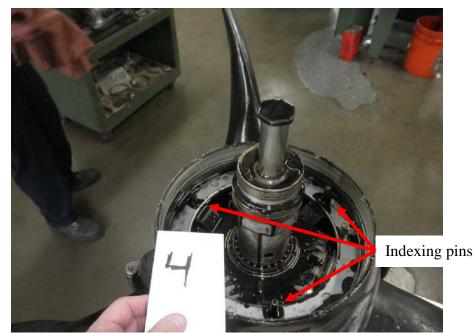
View of No. 4 propeller barrel showing the three indexing pins configuration.
